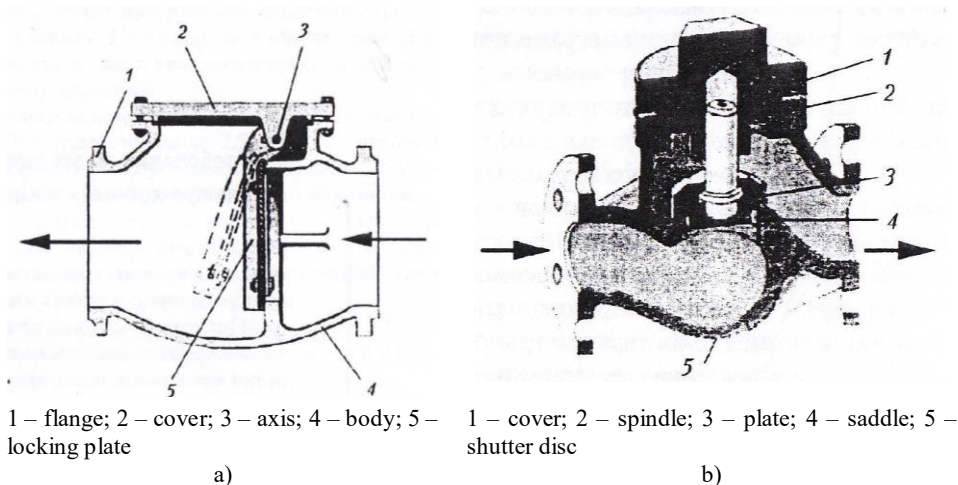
Check valves and gates: a) check valve; b) check valve.
